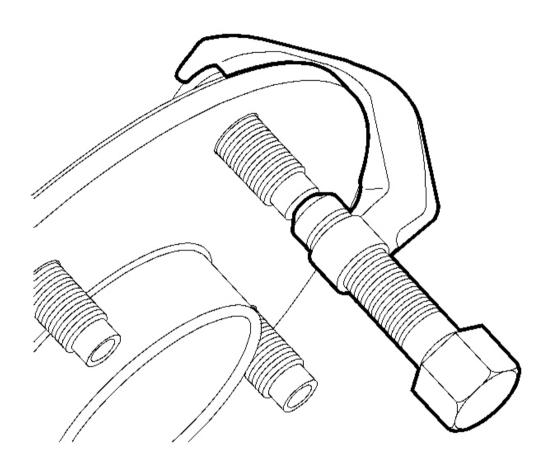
Wheel Stud & Wheel Bearing/Hub Assembly Courtesy of GENERAL MOTORS CORP.
